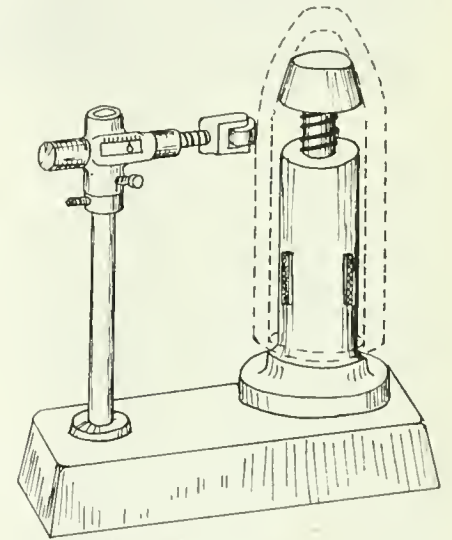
GAUGING FIXTURE FOR CHECKING CONCENTRICITY OF FORGING
